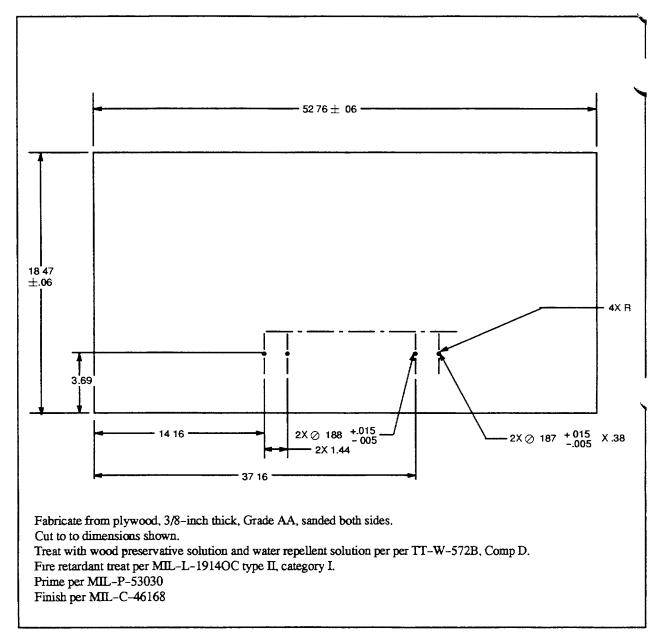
Cover Assembly Fueling Manifold, Panel Side
